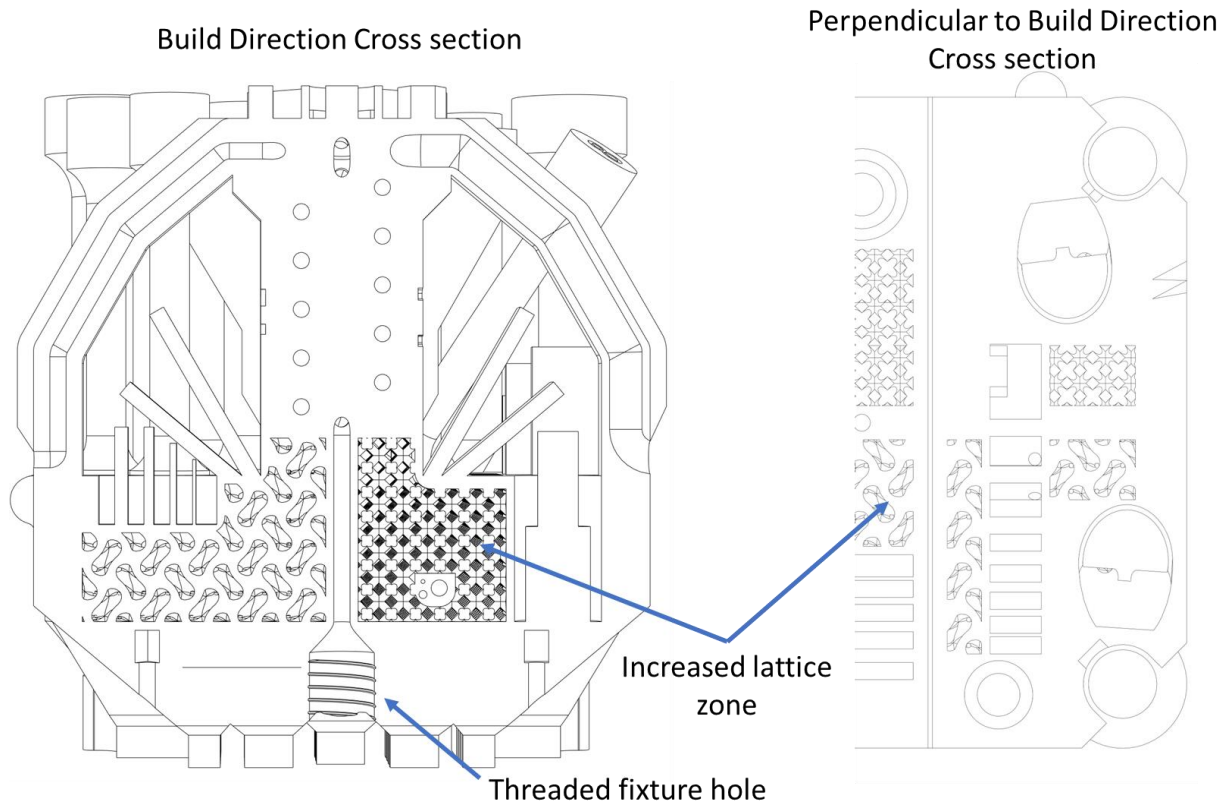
Redesigned cross section indicating larger lattice region for reduced through thickness and threaded hole for fixturing
